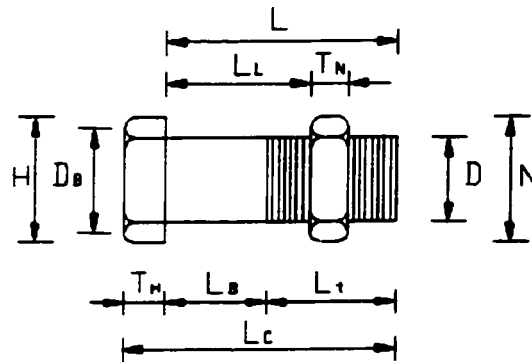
Detailed dimensions of the bolt (A325, 5/8 inch)
